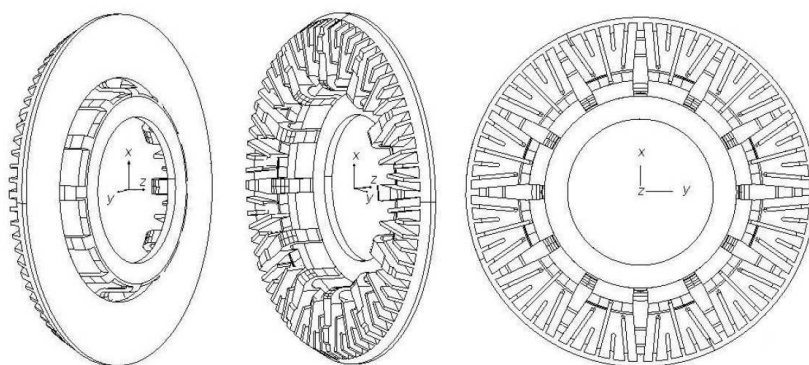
Railway wheel mounted brake disc CAD model views, baseline model.
